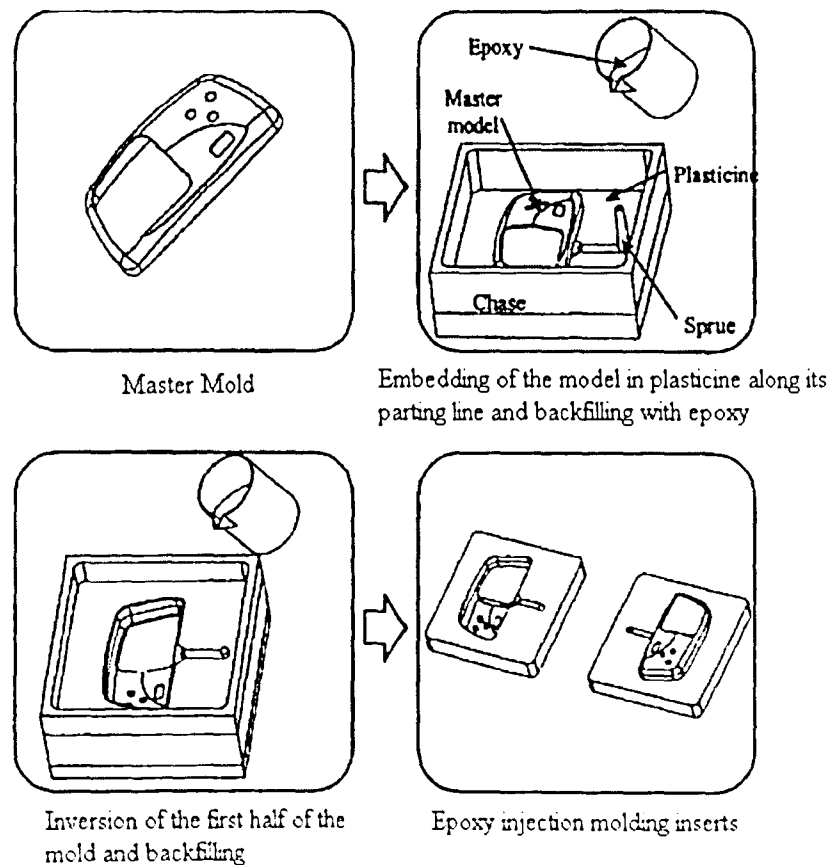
Illustration of Aluminum-Filled Epoxy Tooling [6]
